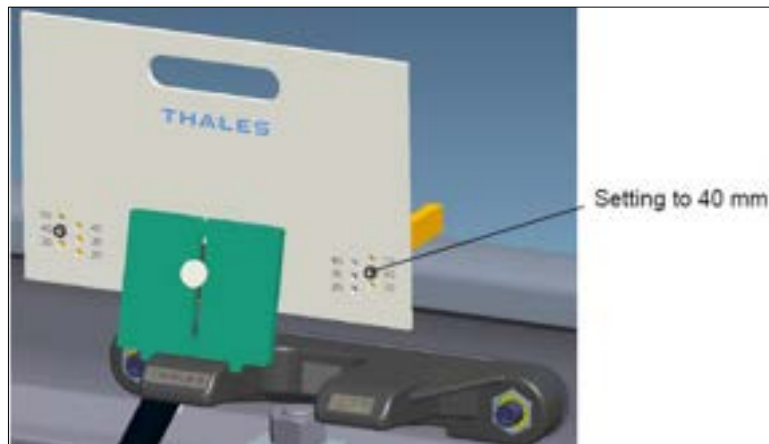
Position of Dummy Wheel during Testing SK30H
